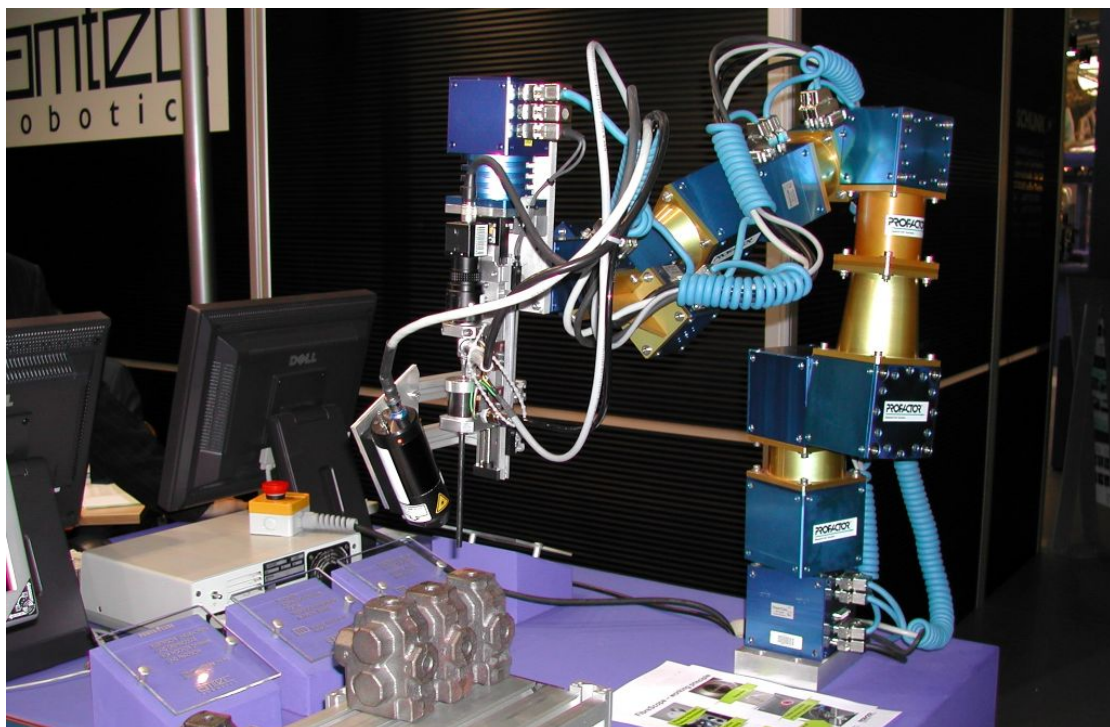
Prototype of the bore inspection system presented at an industrial fair.
